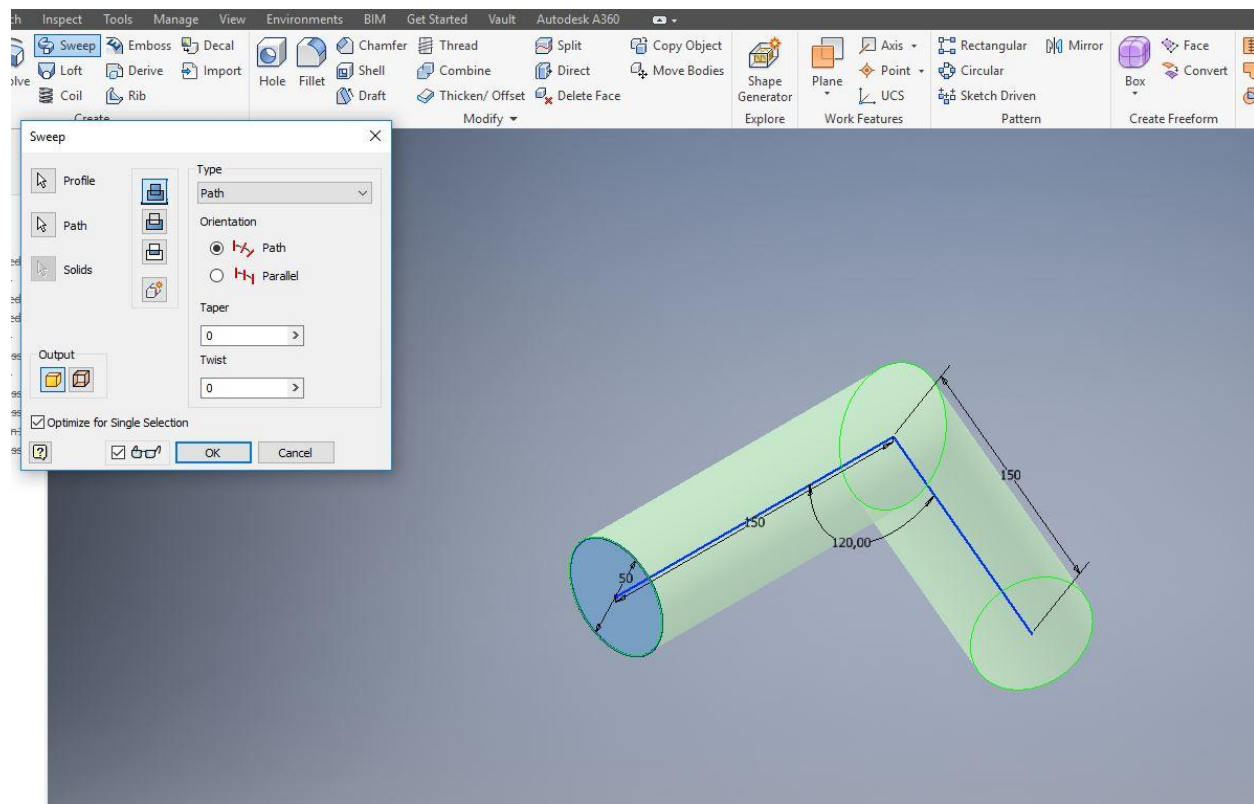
Creating the outlet of the first chamber using the “Sweep” tool
